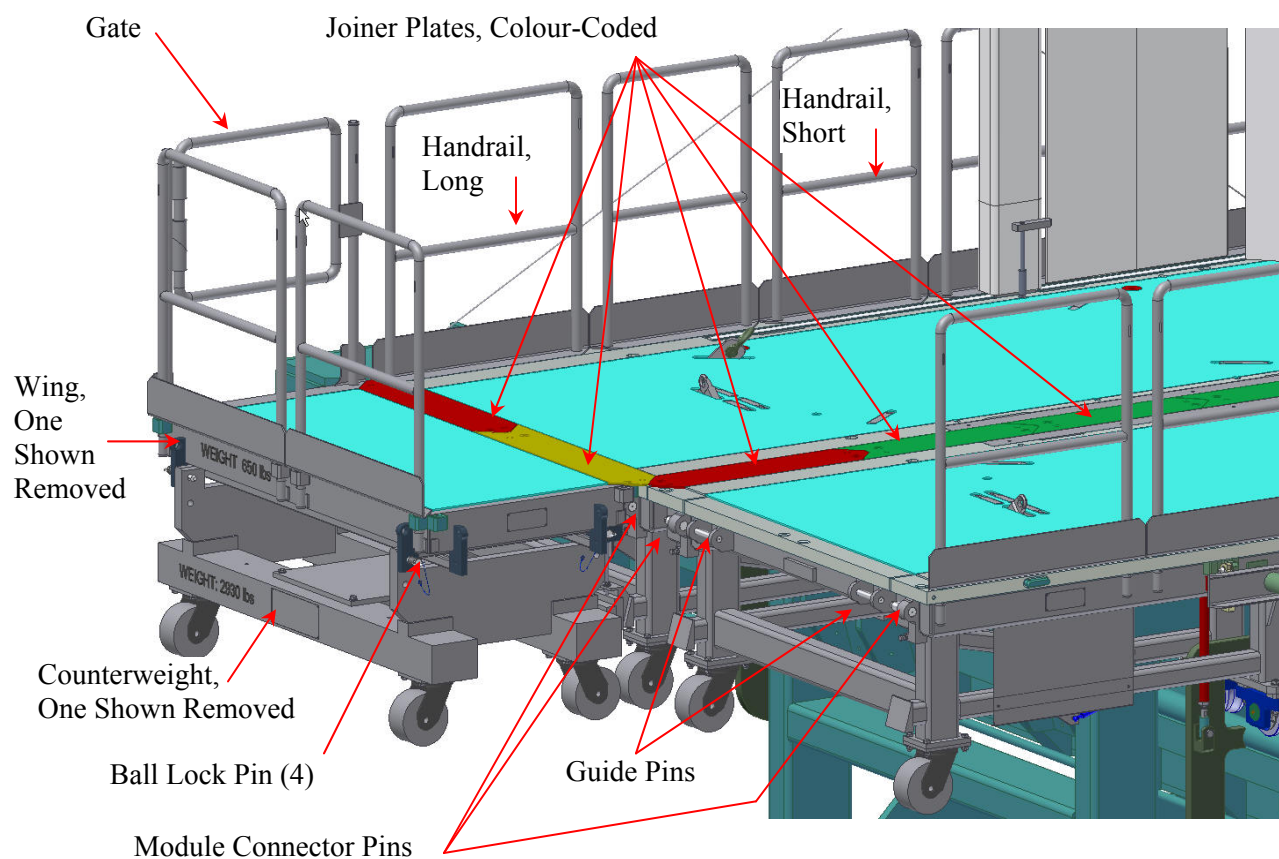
Module Pin & Lug Connections and Joiner Plate Detail
